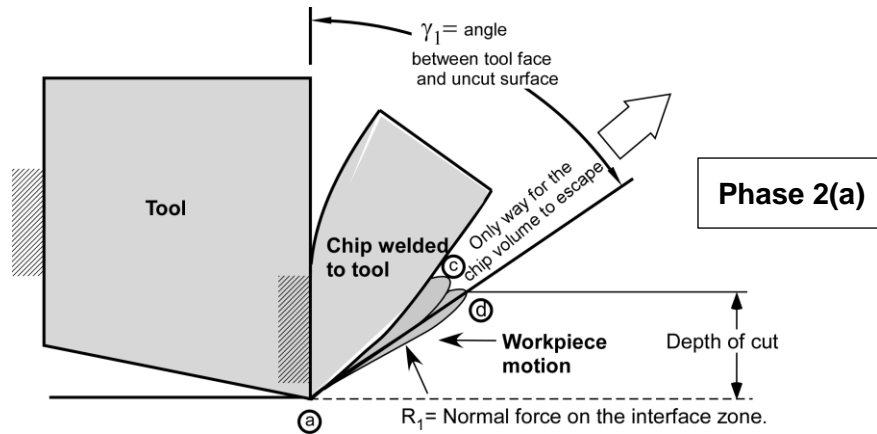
After the Chip is Welded to the Tool, a New Flow Process Begins with the Workpiece Coming in from the Right
